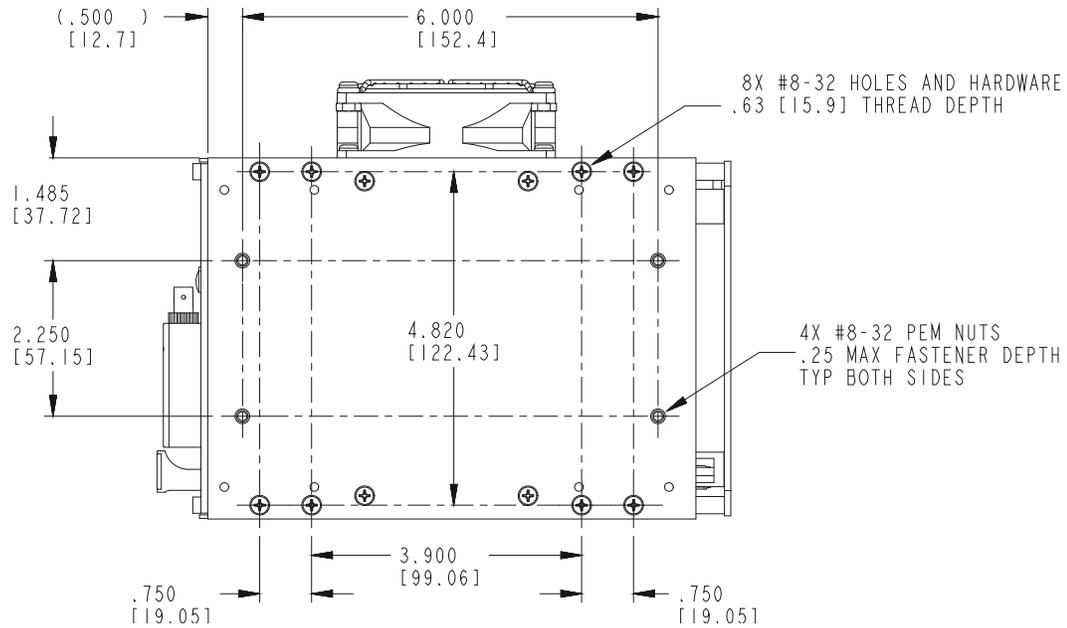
Side View of Typical Model 903 Remote Card Cage
